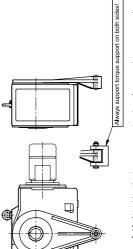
Attaching the torque support on bevel gear and worm gear units
